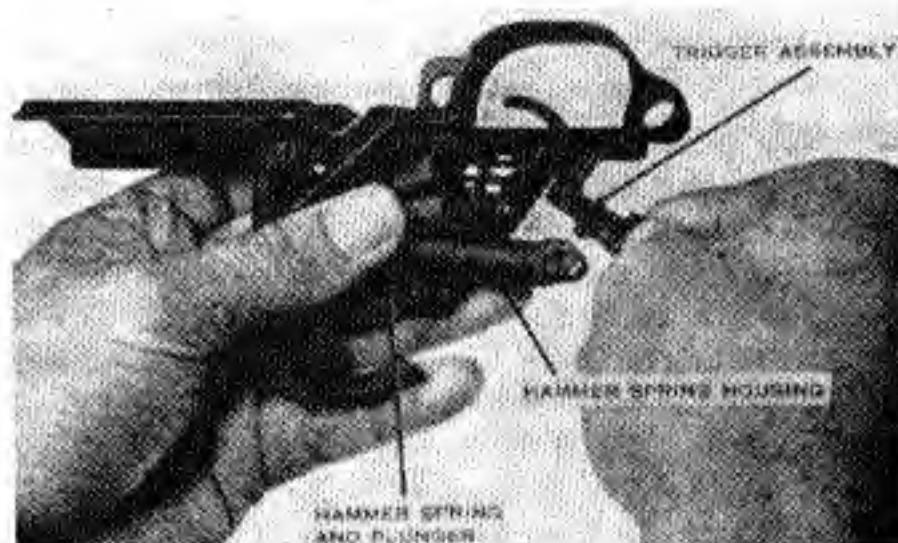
Removing trigger assembly, hammer spring housing, hammer spring, and hammer spring plunger.
